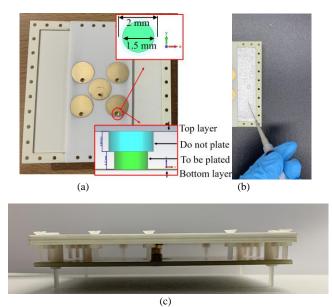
Photographs of the fabricated antenna. (a) Top view without cover layer and fabrication processing for holes; (b) Ground drained by a syringe; (c) Side view of assembled antenna.
